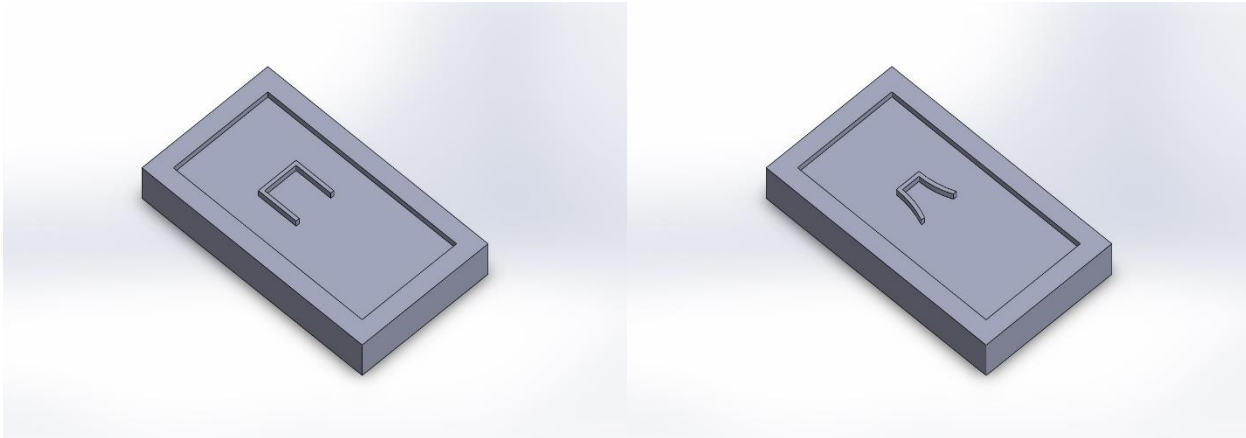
Modification of membrane layer. (Left) Pre-modified membrane layer mold. (Right) Post-modified membrane layer mold.
